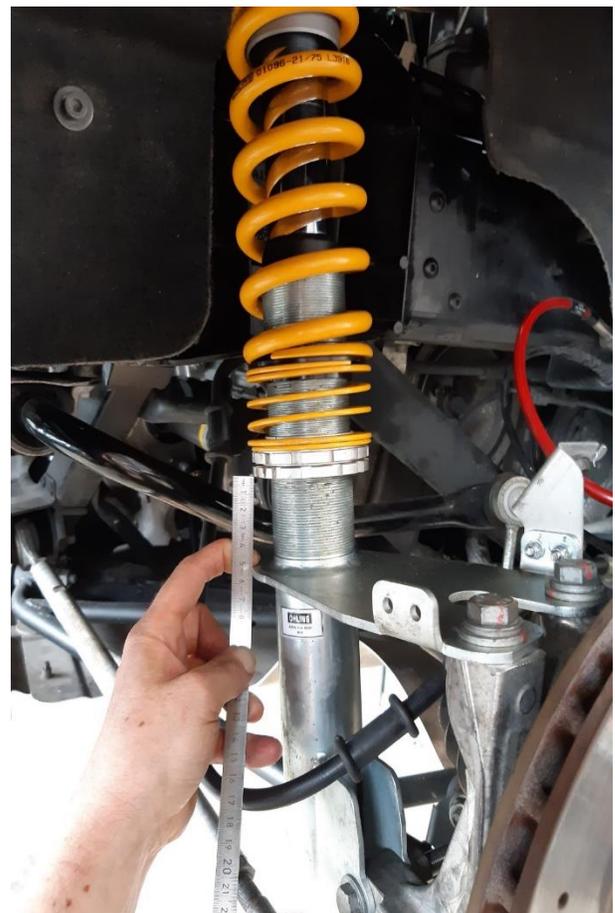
rear shock absorber, Base setup: Dimension B = 50mm between lower edge of the lower lock nut and the upper edge of the spring strut tab.
